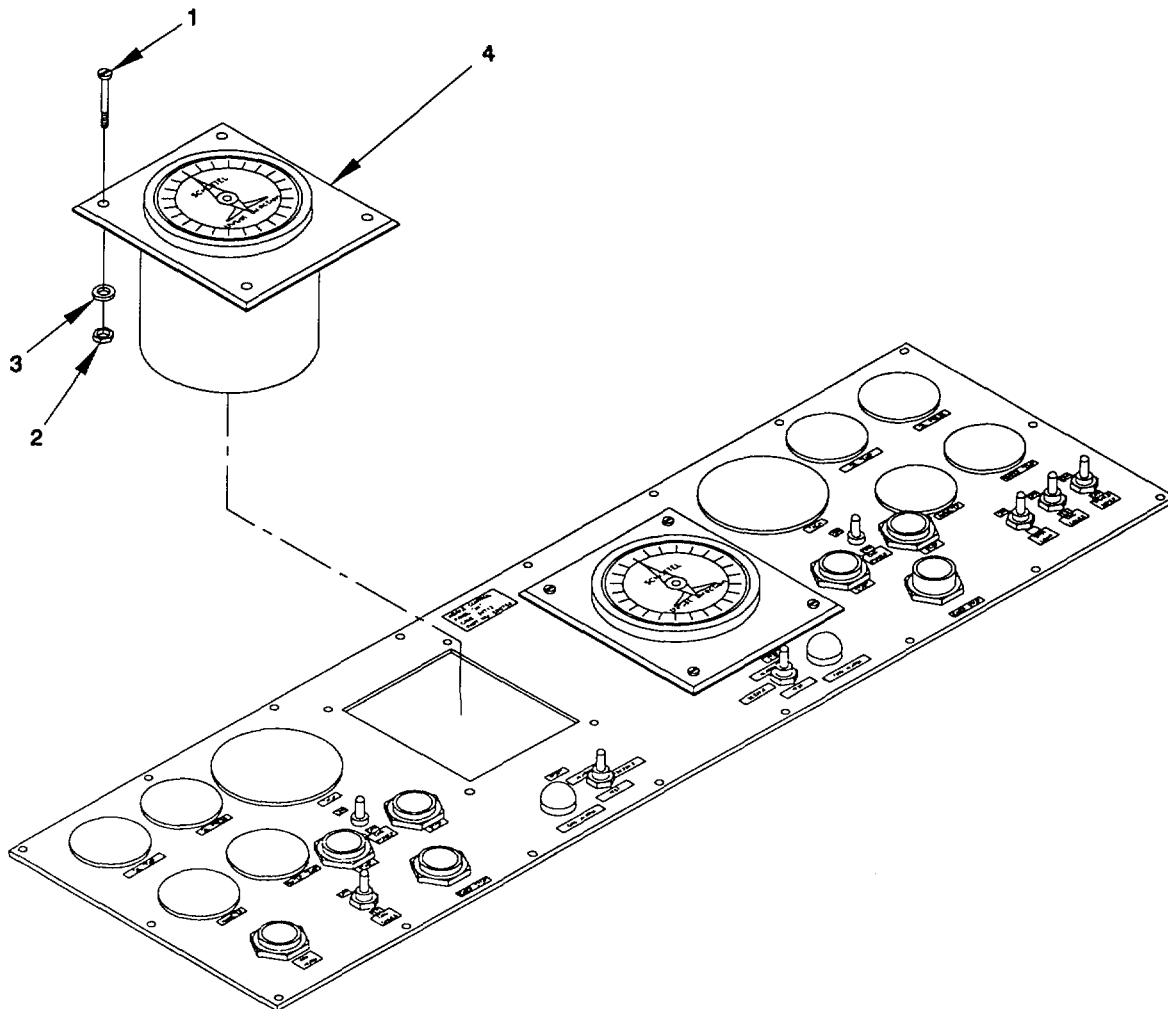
Thrust Direction Indicating Device, Middle Control Panel "A1", Remove/Install/Adjust. (Sheet 1 of 2).
